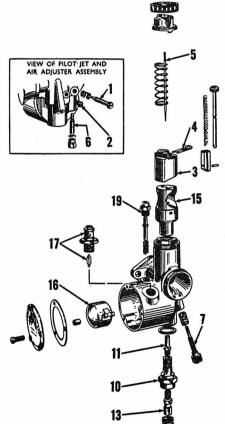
Exploded view of Amal carburetor typical of type used on 175cc mod-
